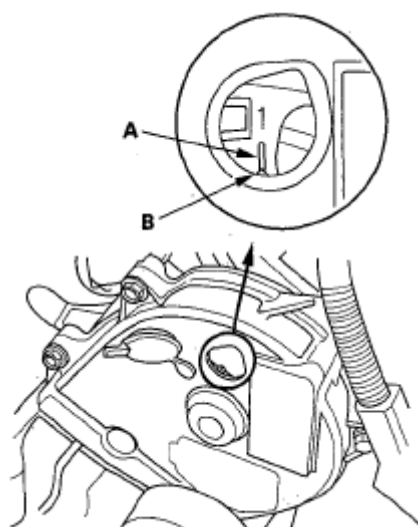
Identifying No. 1 Piston Top Dead Center (TDC) Mark On Front Camshaft Pulley
